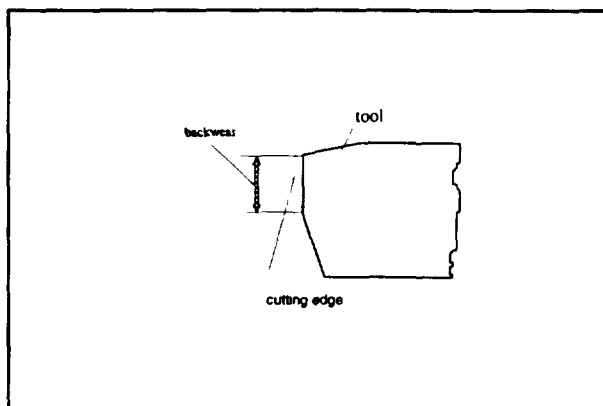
Wear of the cutting edge and the definition of the backwear
